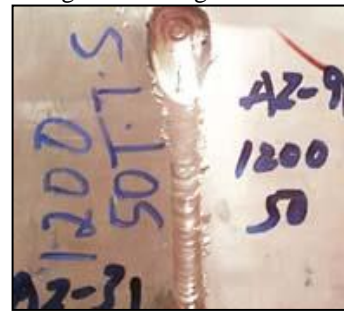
The weld was made at 1200rpm at 50 tool traverse speed with dissimilar welding Az91/Az31 alloy
